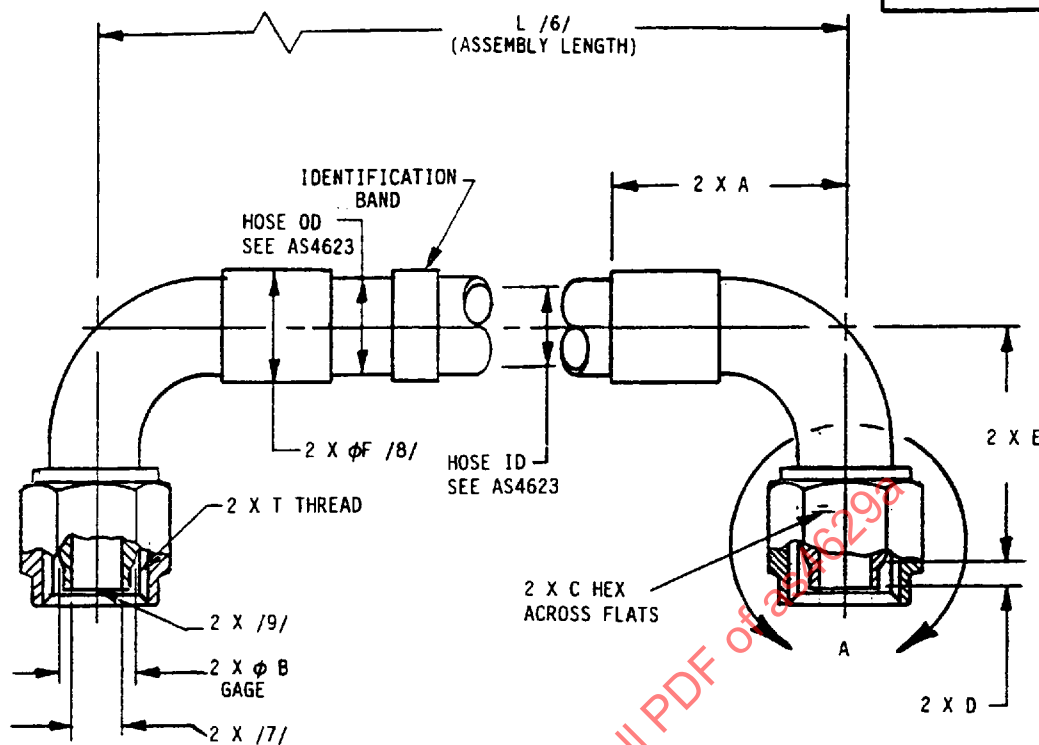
HOSE ASSEMBLY, 90° ELBOW TO 90° ELBOW
